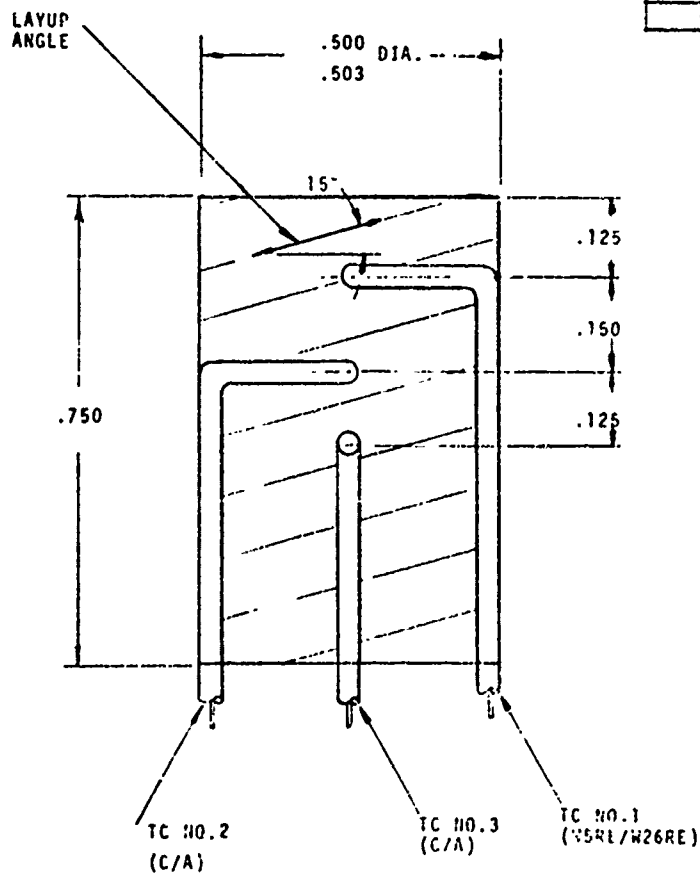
SCHEMATIC DRAWING OF THERMOCOUPLED PLUG
